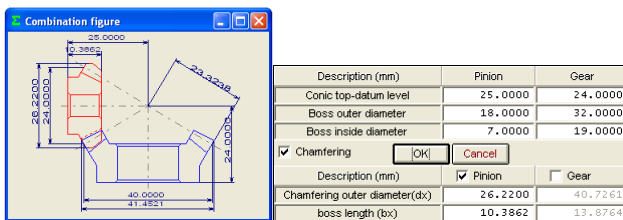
Gear Assembly Drawing and Settings (Chamfering)
